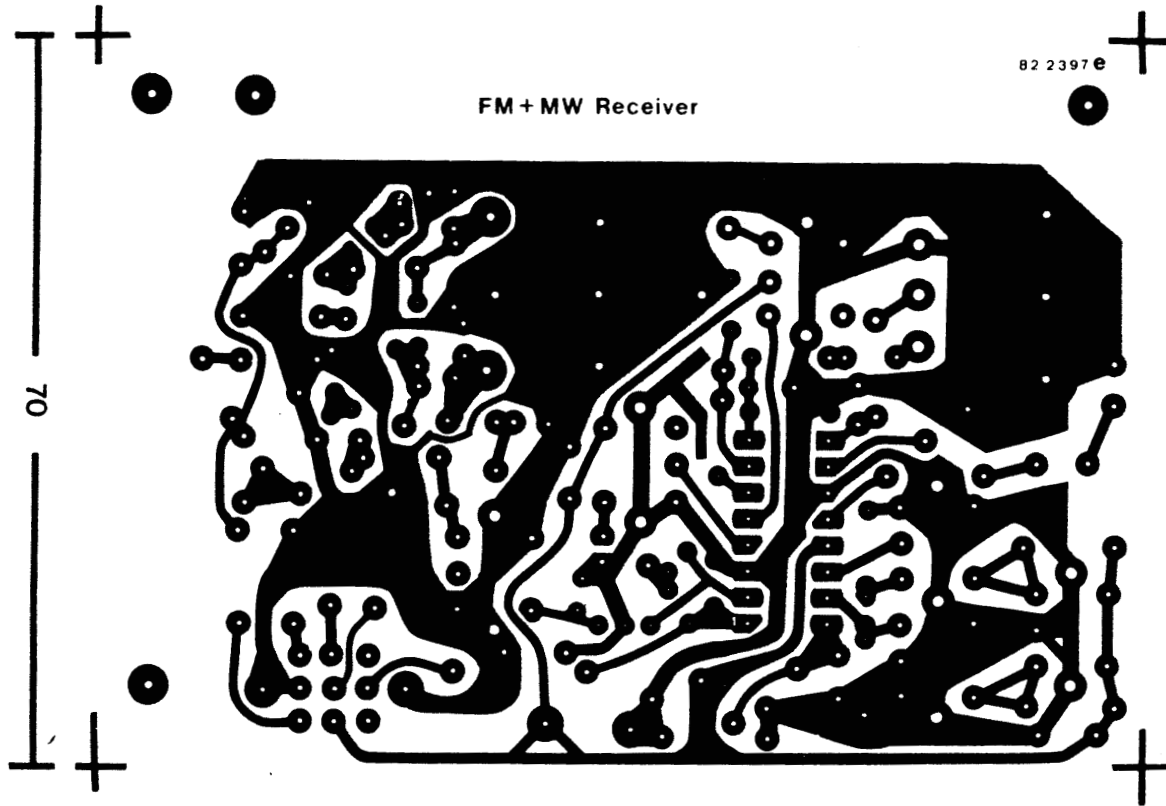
Layout of circuit board (soldered side) of the FM-/AM-receiver
